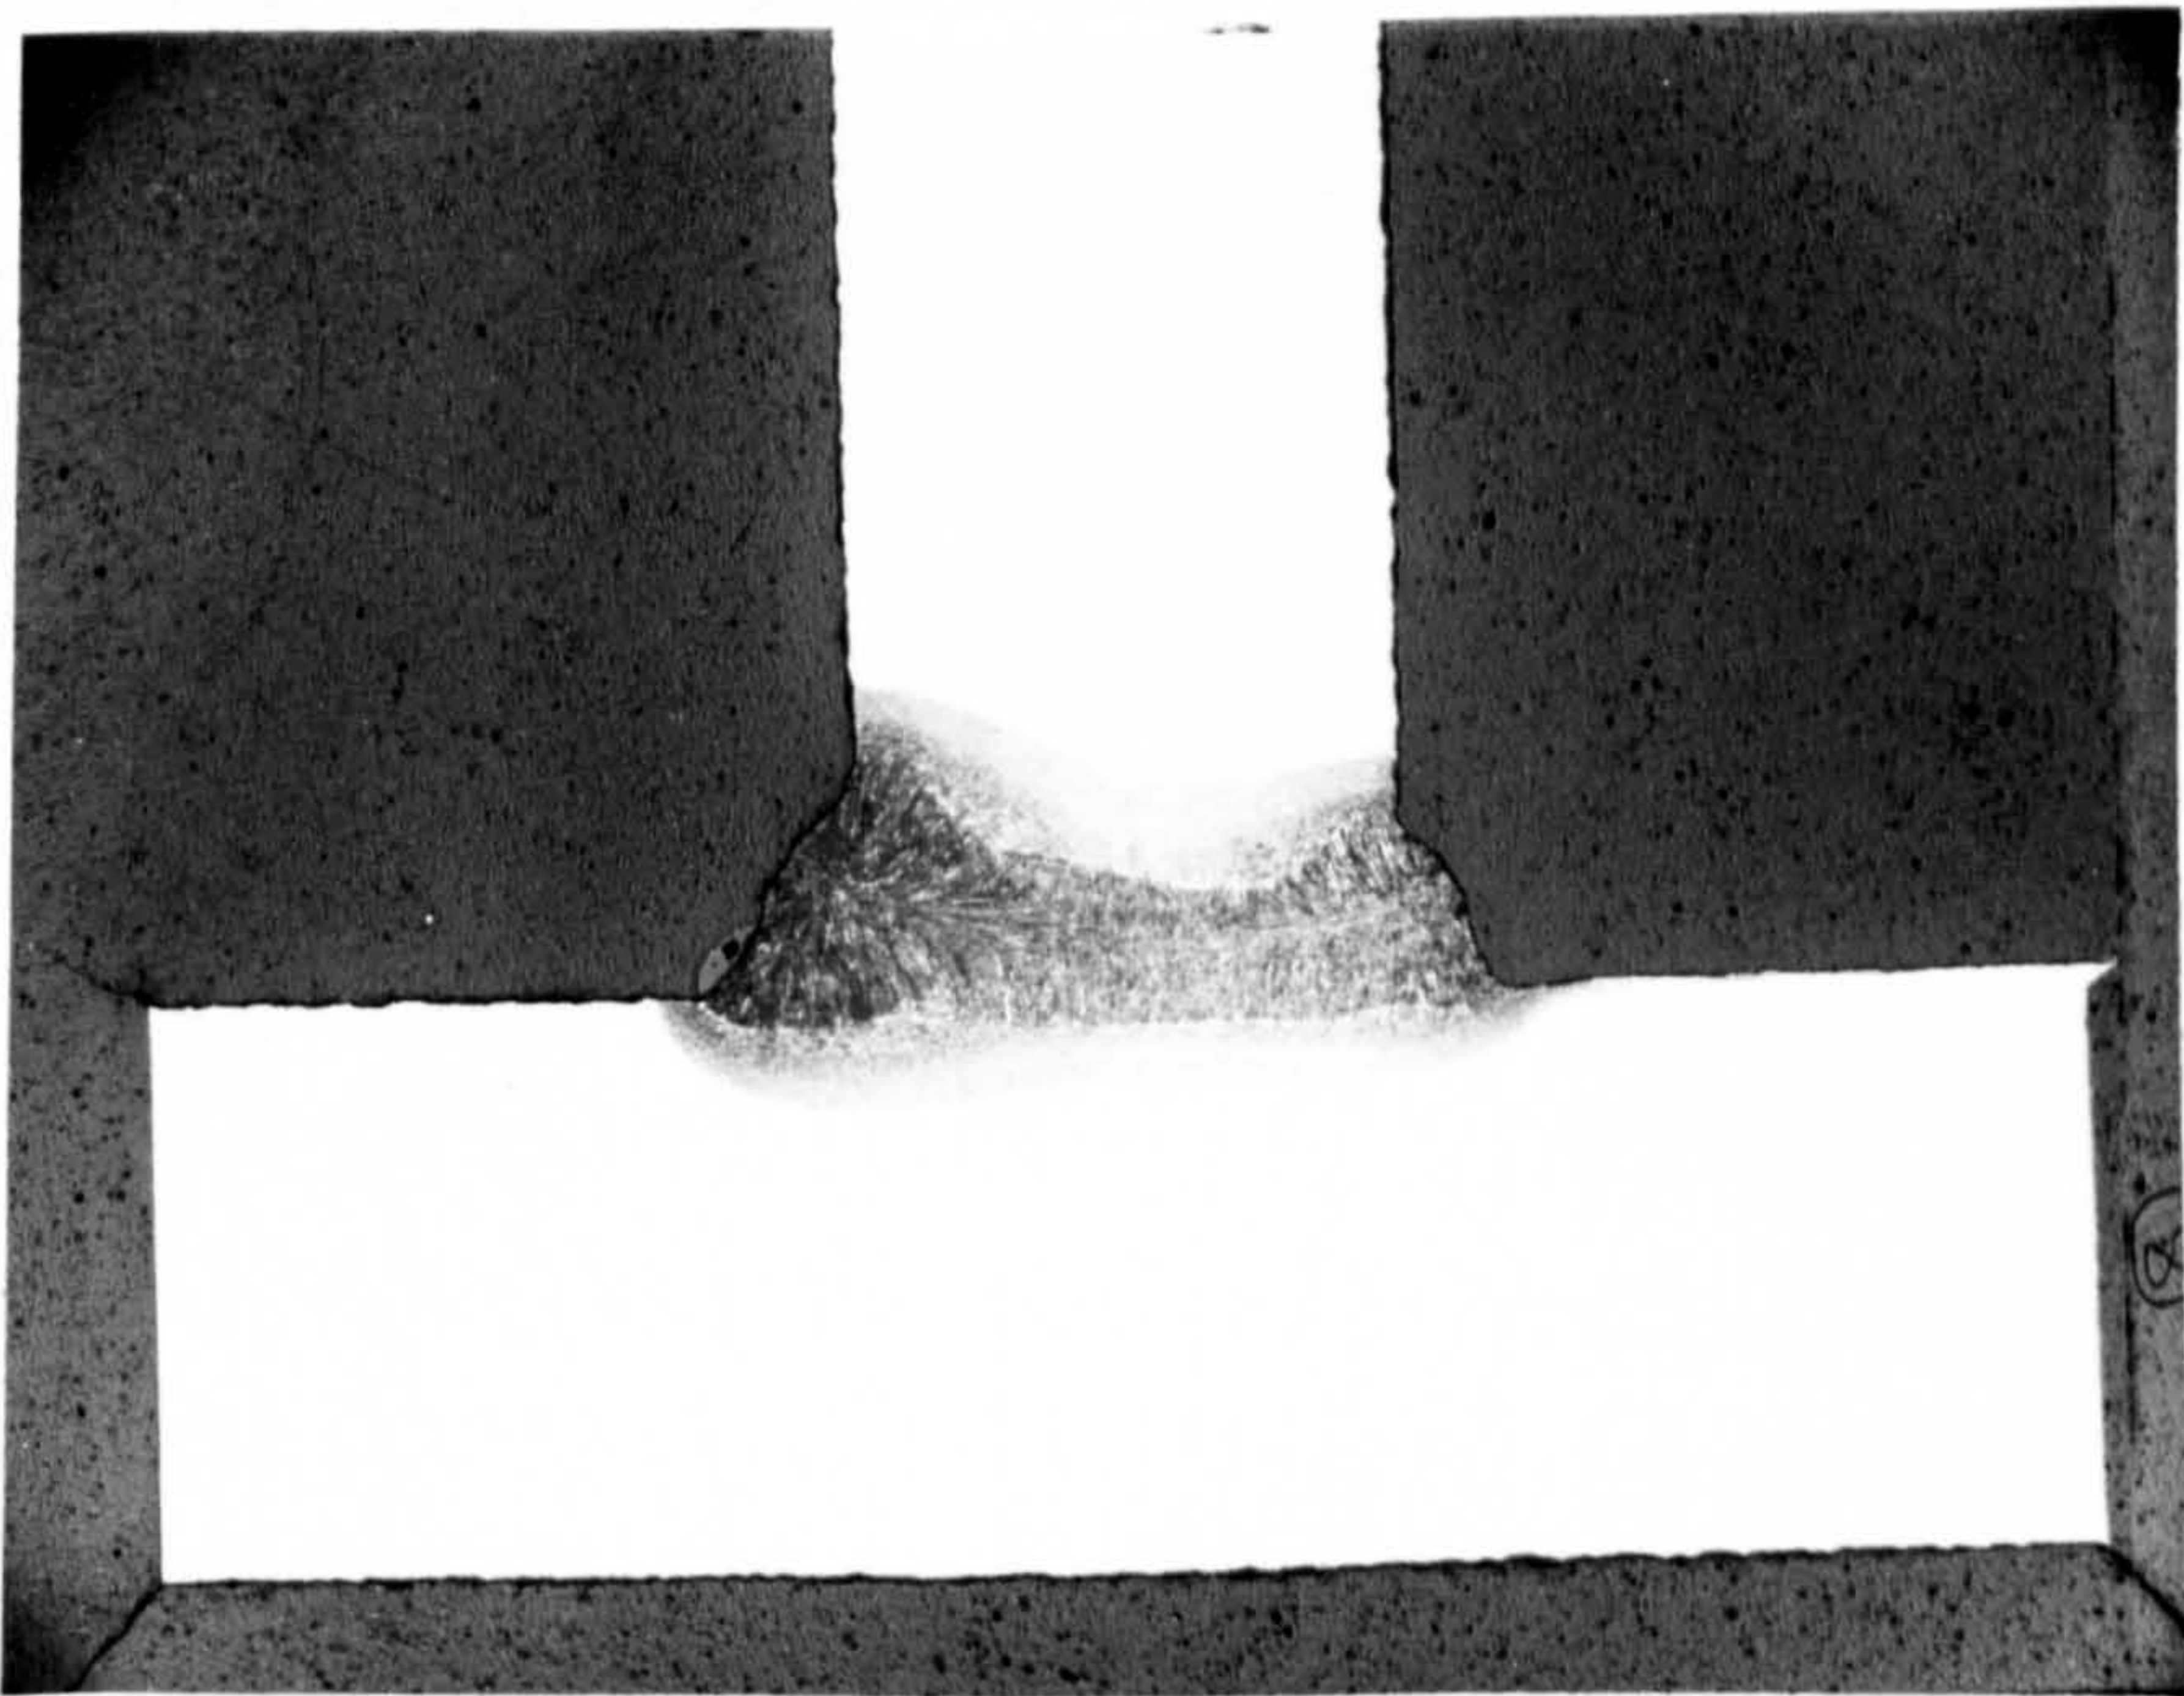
Macrophoto (x4.8) of a skid weld in 6mm thick plate (power = 9kW)
